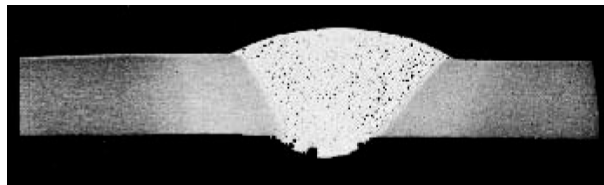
Finely distributed gas porosity in a TIG plate butt weld.
